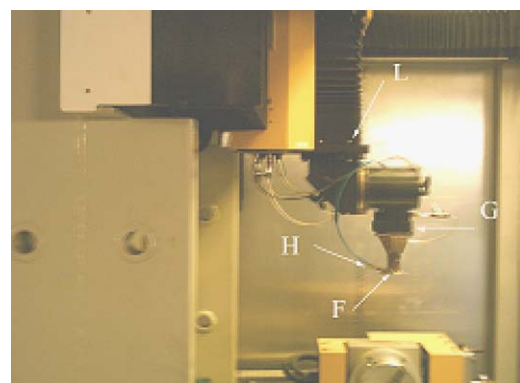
Photographs showing the actual setup used: (F) Shrouding device, (H) side nozzle, (G) laser head and (L) mirror.
